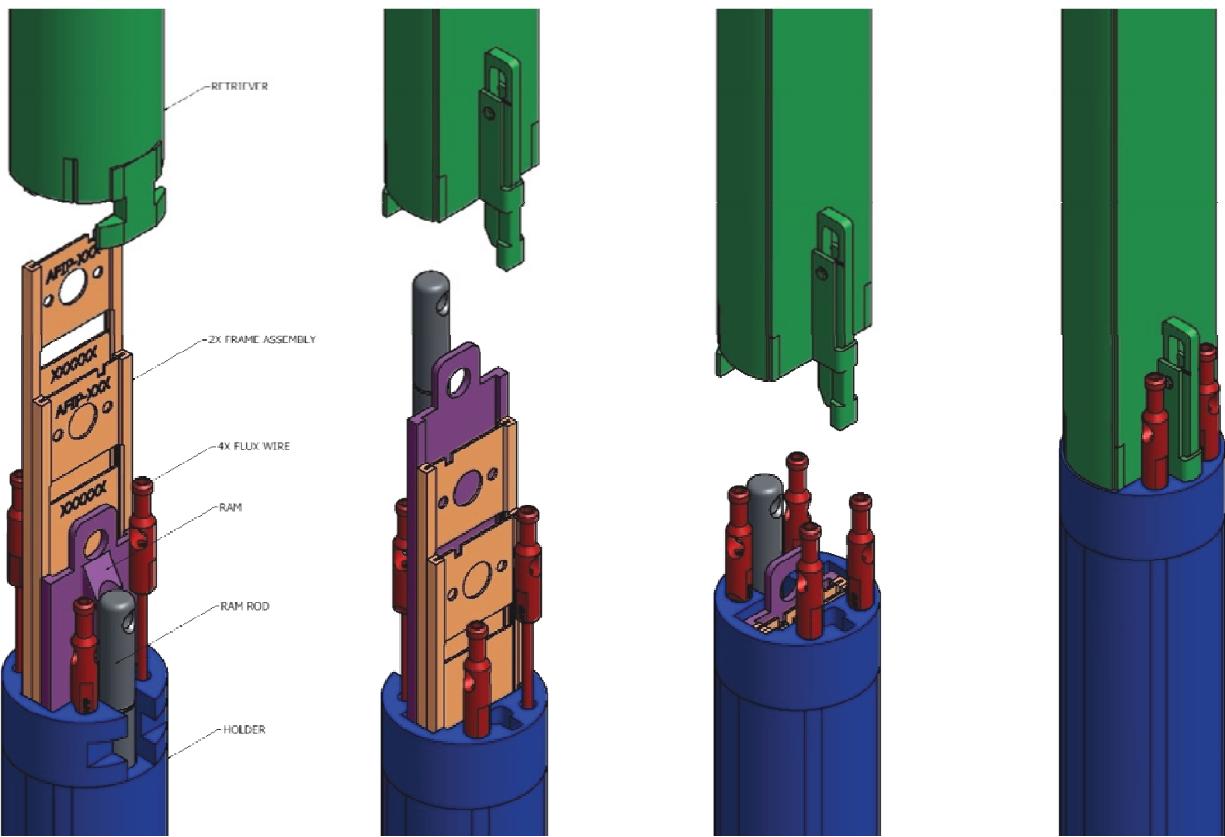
AFIP-6 MKII Test Train Assembly Details.
